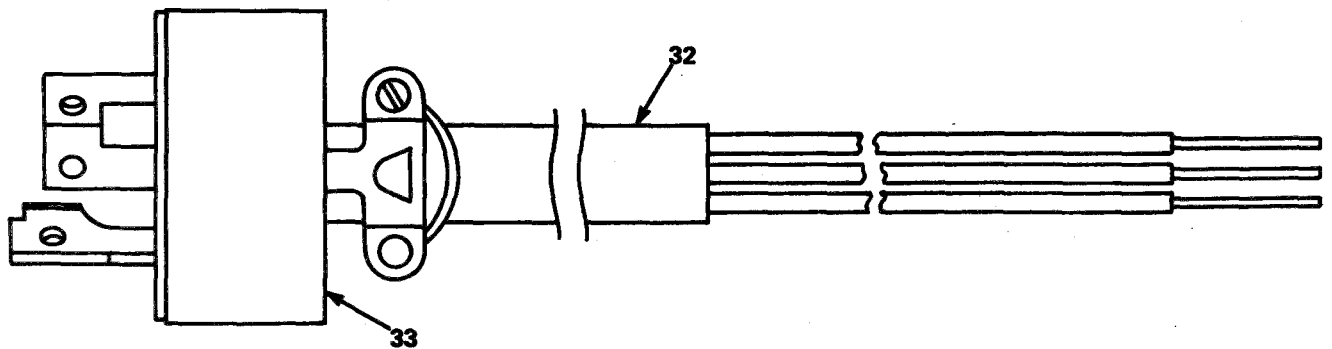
Cable and Wiring Assemblies (Sheet 2 of 4)
